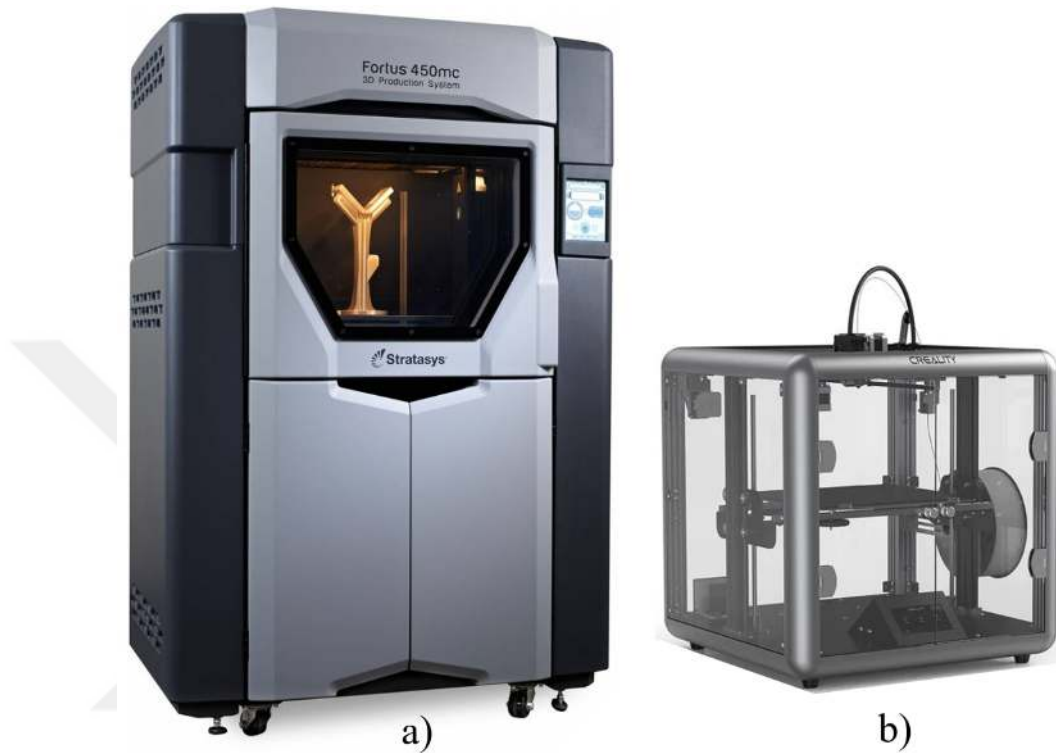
1 Images of the 3D printers used for manufacturing the test specimens
